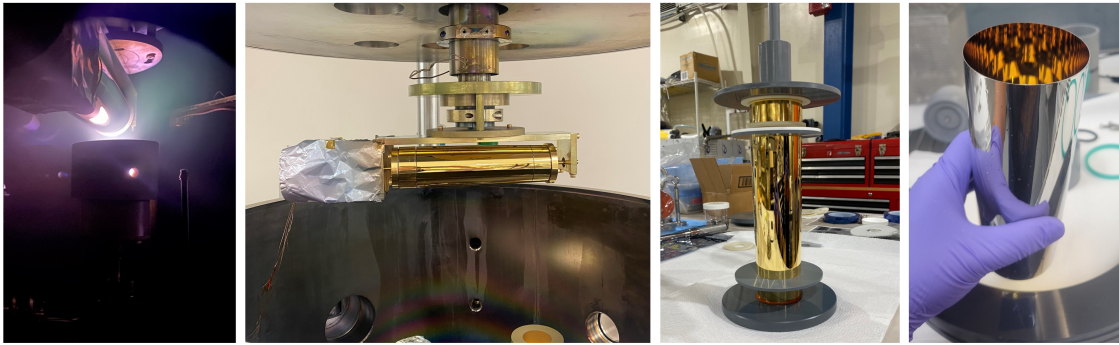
From left to right: Au deposition process on rotating 62 mm mandrel. Au-coated mandrel on rotatory fixture in vacuum chamber. Coated 62 mm mandrel with plating gaskets and shields just before submersion into plating bath. Released Au-coated 62 mm shell, S02.
